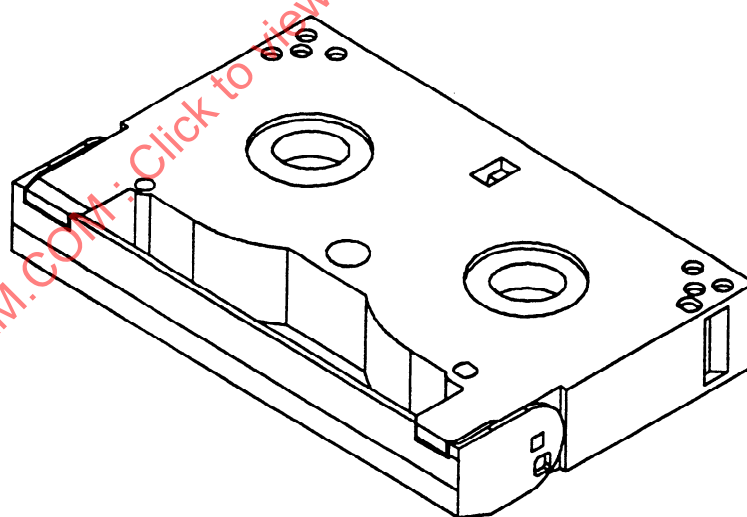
Tape cartridge assembly bottom view (lid closed)
